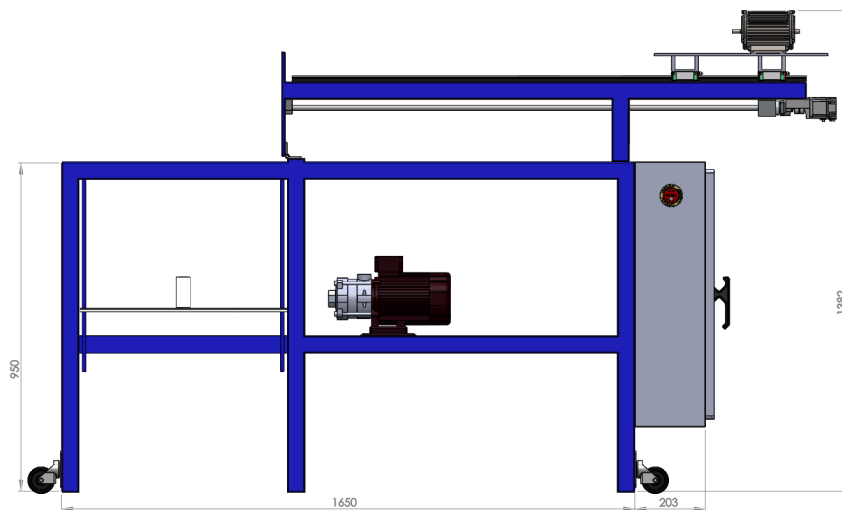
Side view of the rig in folded position (dimensions in mm)
